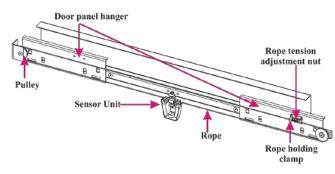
CAD design of lift automatic door operator test jig with the rope tension meter unit clipped onto the rope
